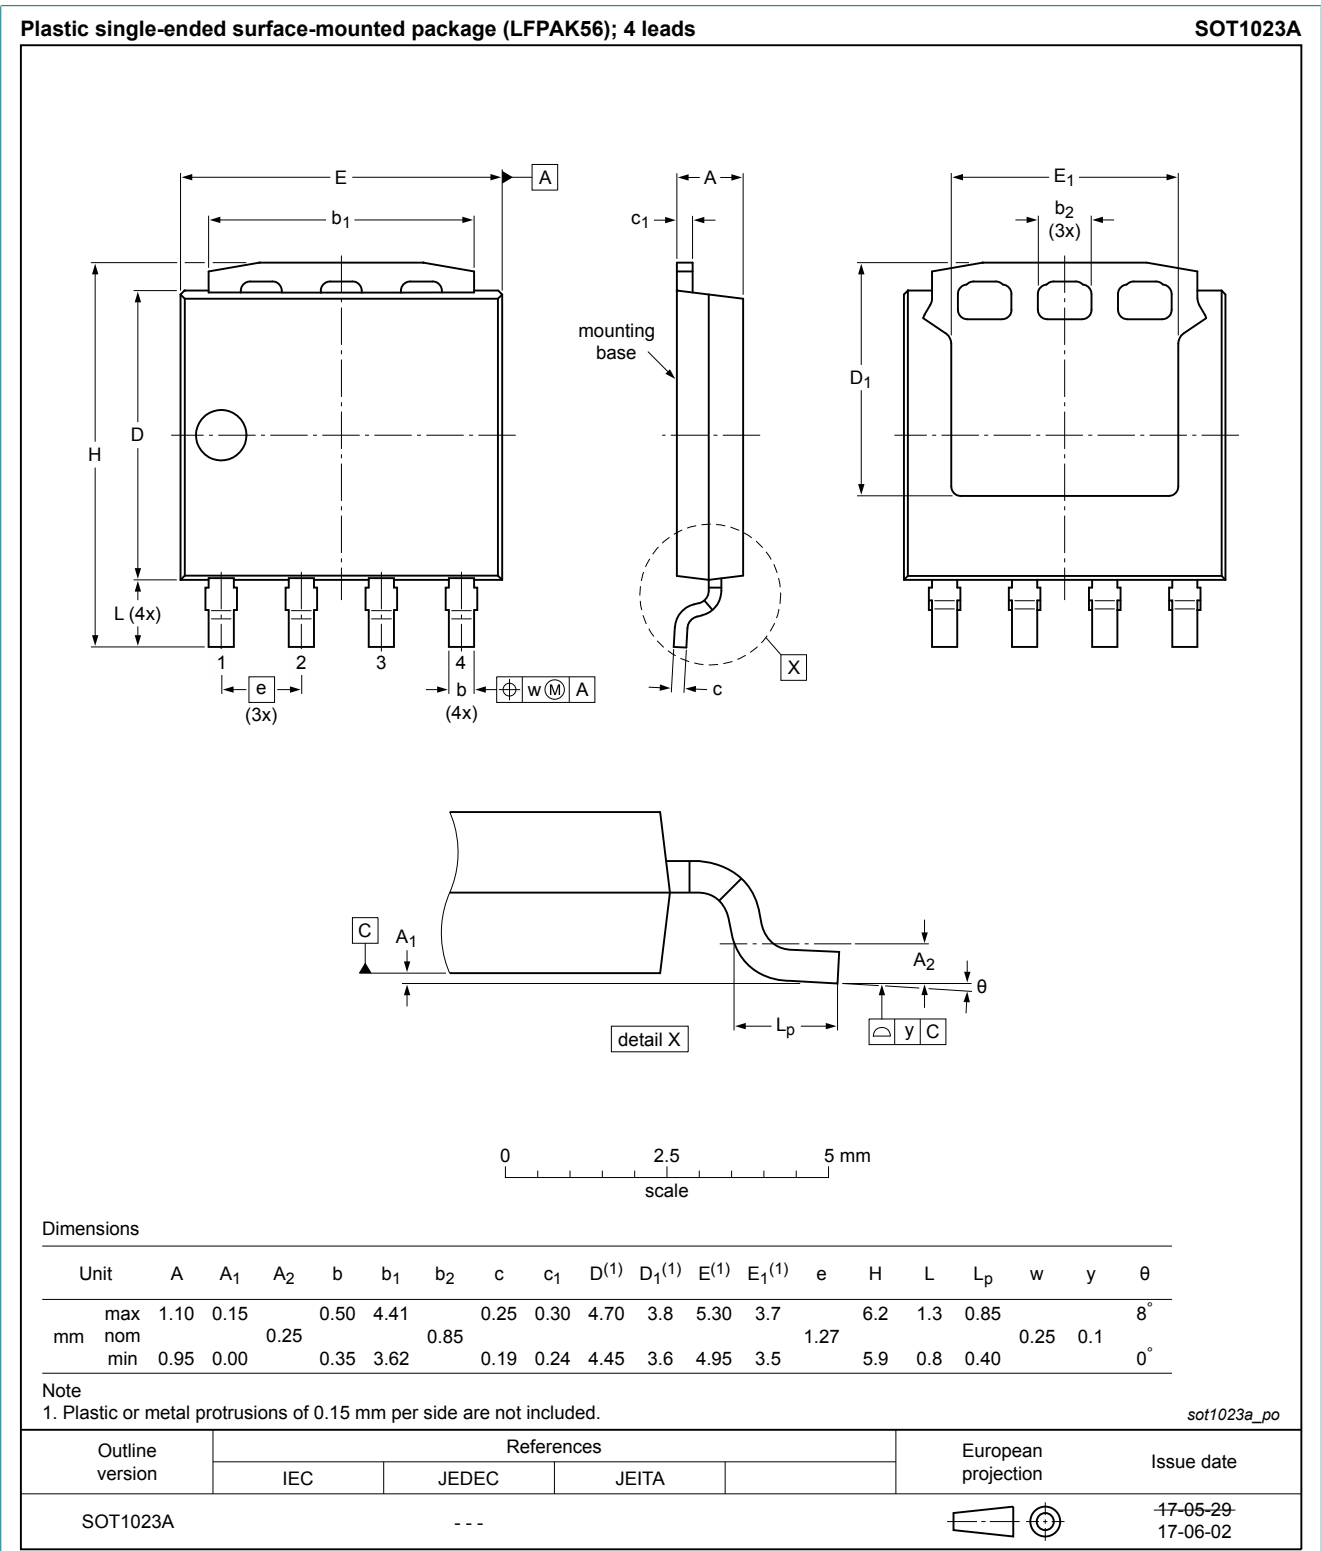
Package outline LPAK56-UL2595 (SOT1023A)
